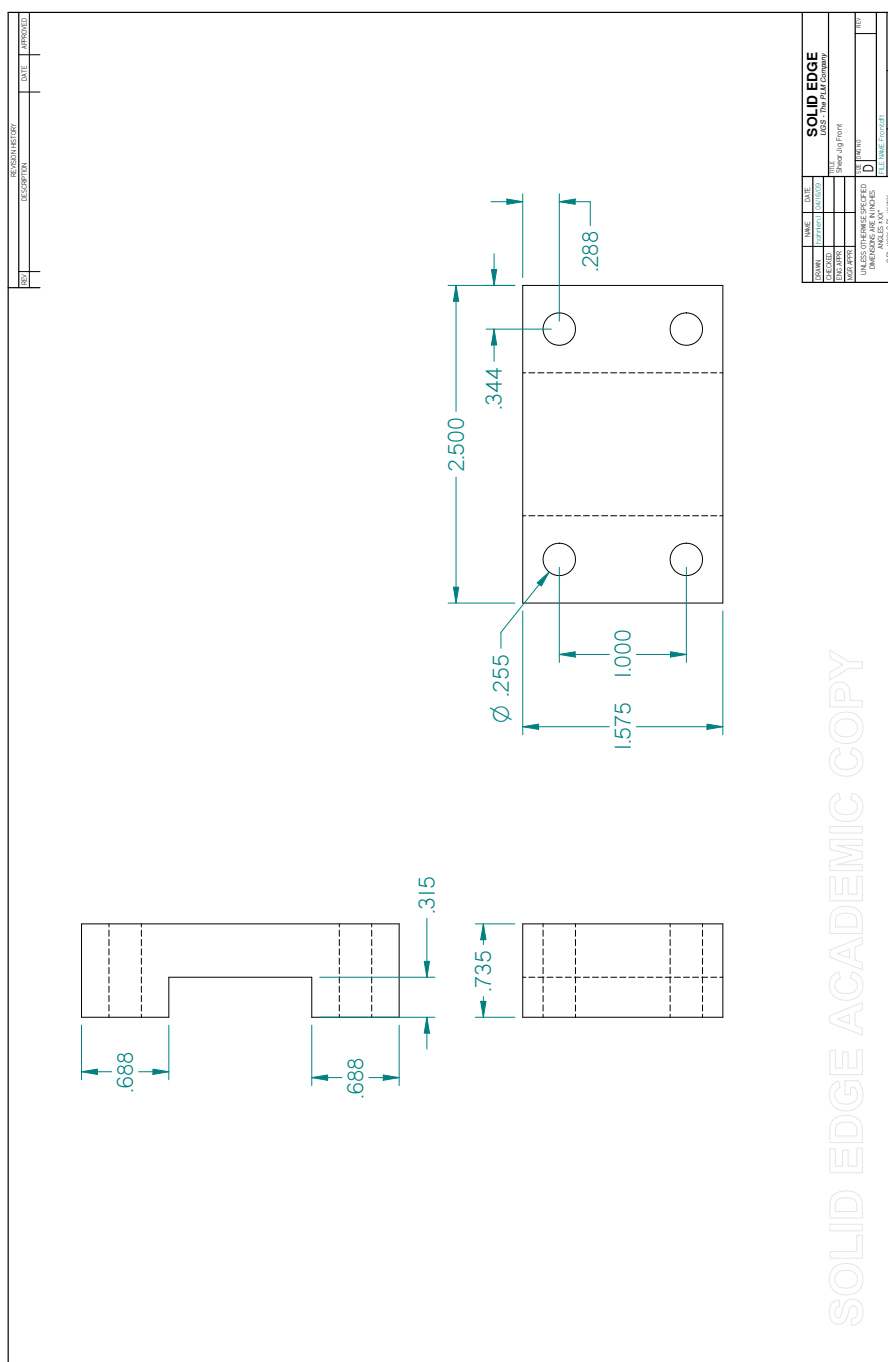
Shear testing jig front half used for bulk solder, USS lap shear, and UAM tests. All dimensions in inches.
